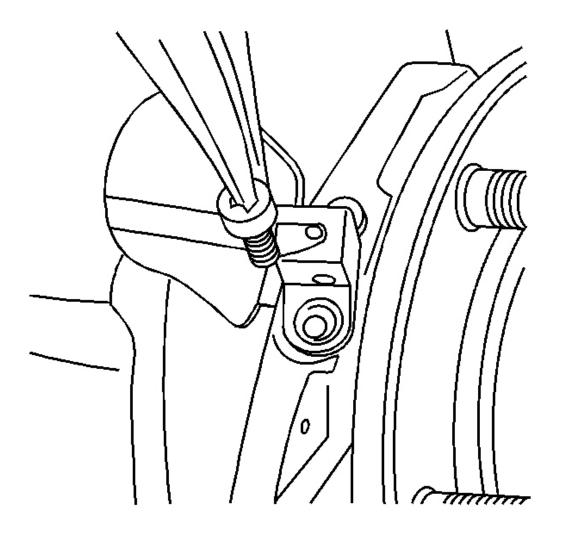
Removing/Installing Sensor Mounting Screw Courtesy of GENERAL MOTORS CORP.
